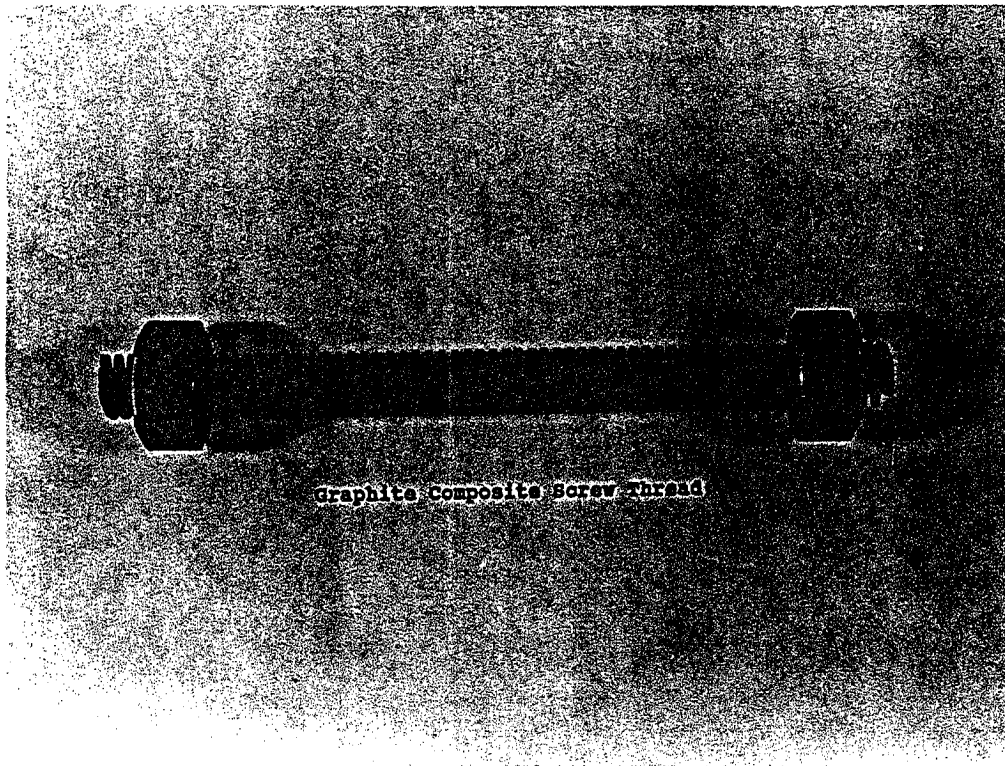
Threaded Composite Rod with Standard Acme Steel Nut.
